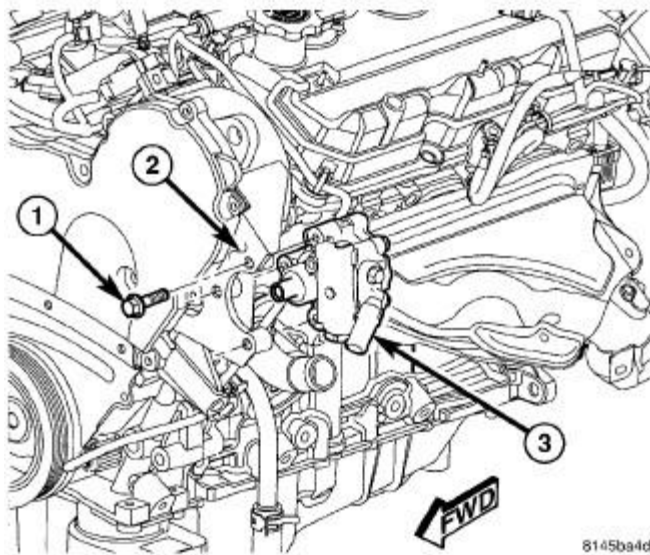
POWER STEERING PUMP - 2.7L/3.5L
